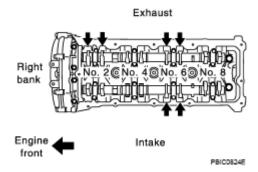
Locating Valve Clearances Mark Location Courtesy of NISSAN MOTOR CO., U.S.A.
